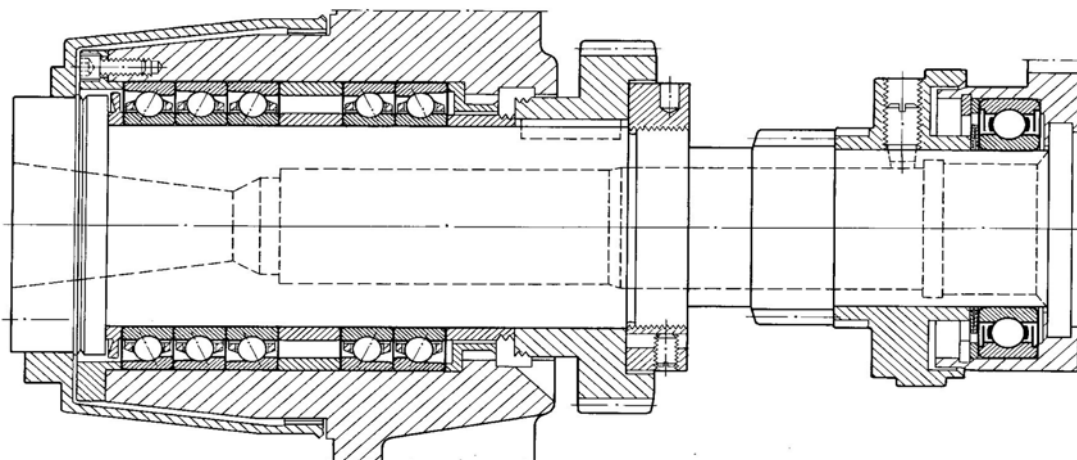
Horizontal machining centre, Thyssen-Hüller Hille GmbH , Germany
